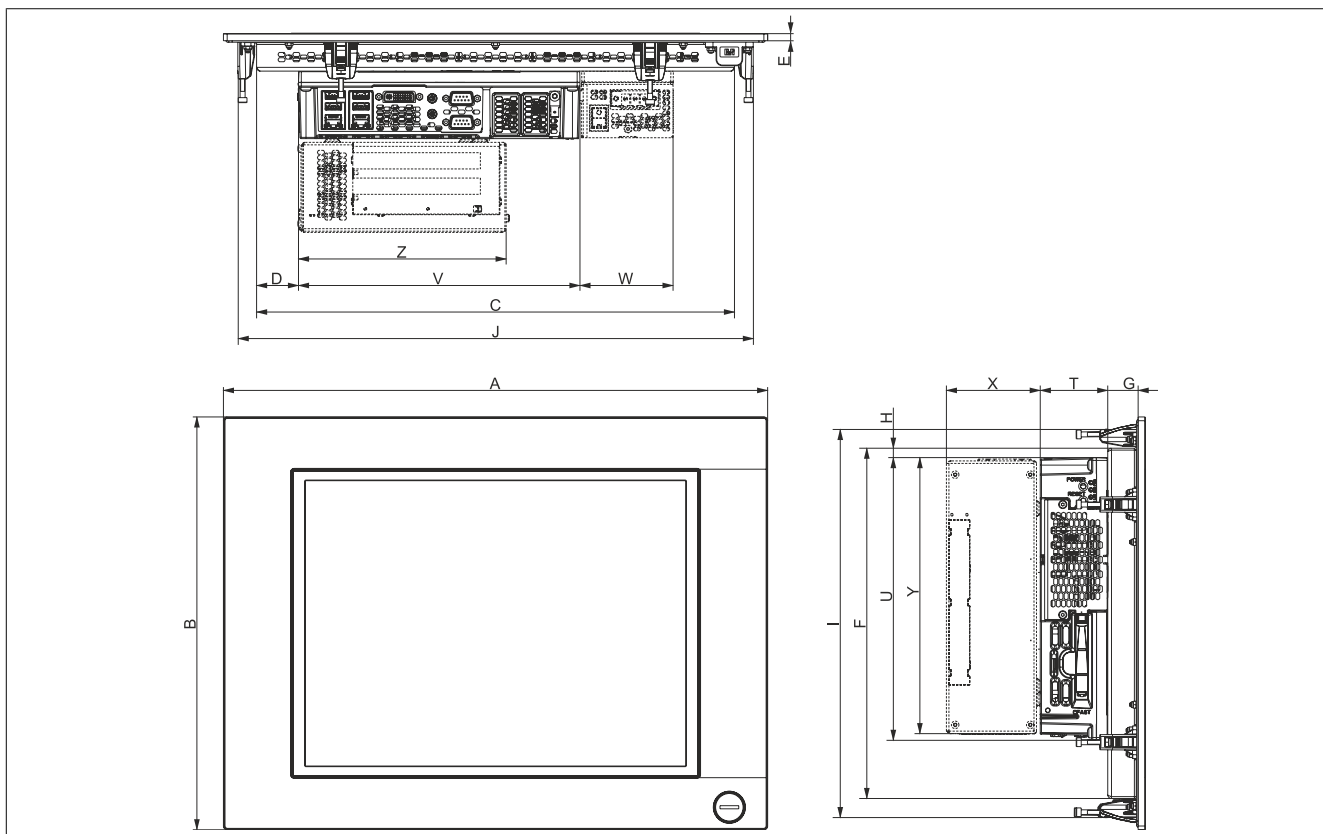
Panel PC 900 with AP1000 display units with clamping blocks - Dimensions
